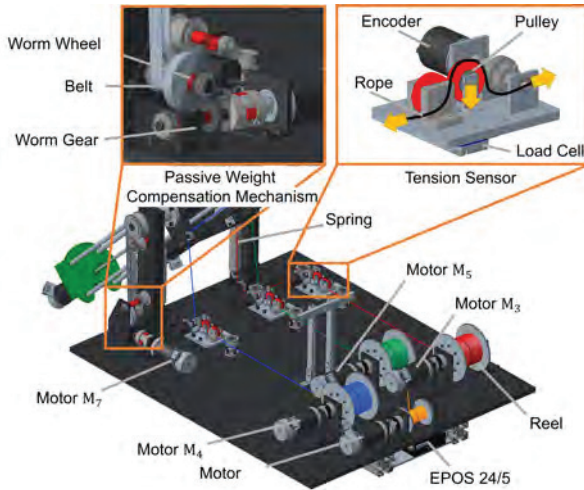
The base is equipped with a passive weight mechanism and a tension sensor for bending rope.
